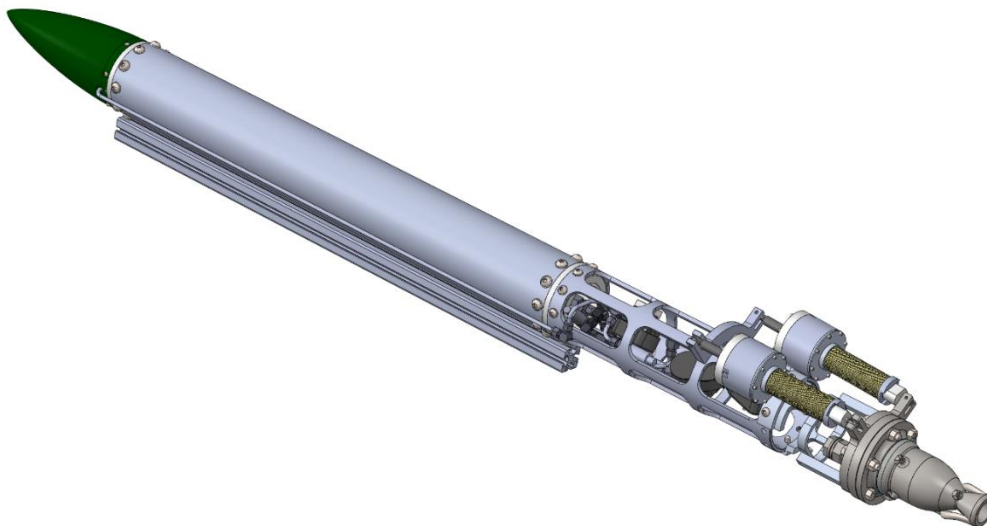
Full super-project assembly, incorporating Thrust Vector Control, Engine and Fuel and Body group subassemblies
